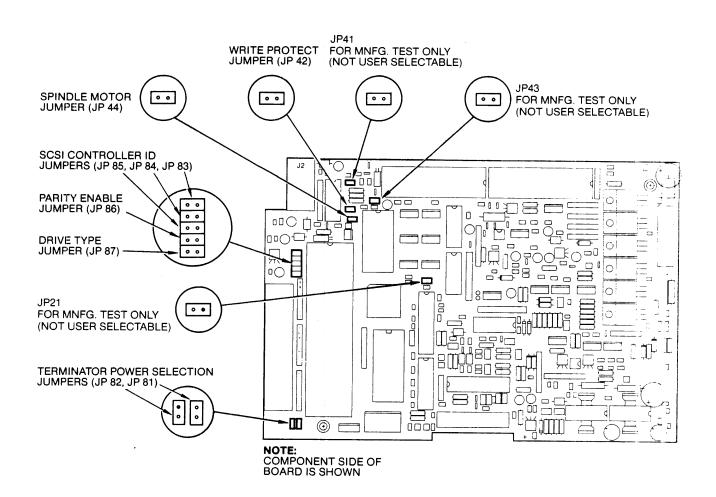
XT-3170/3280 Drive Jumper Options PCB with a NON-SHROUDED Connector
